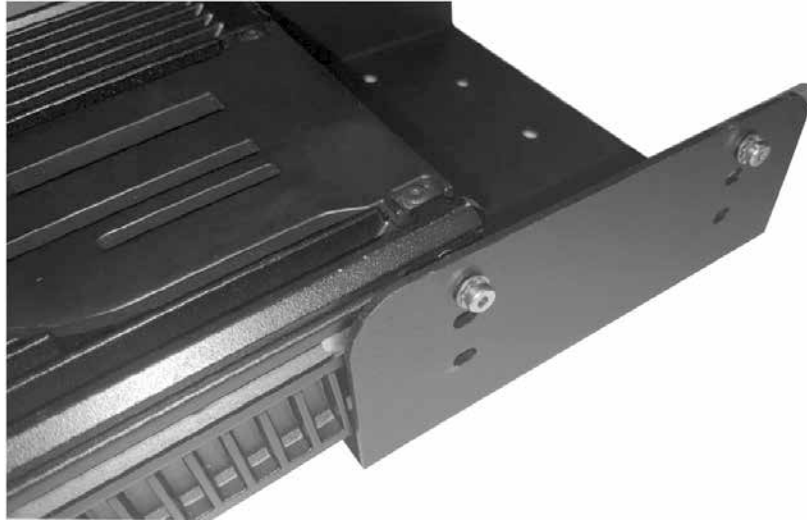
Align Bracket Rail Plates with VCH Rails
